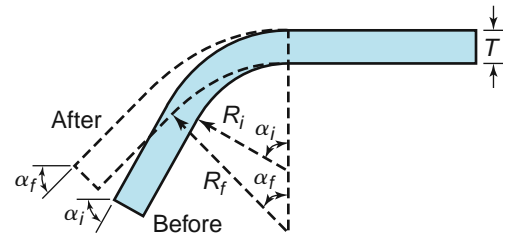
Springback in bending. The part tends to recover elastically after bending, and its bend radius becomes larger. Under certain conditions, it is possible for the final bend angle to be smaller than the original angle (negative springback).
